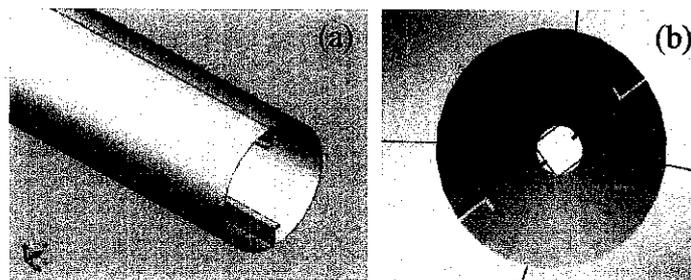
Drum granulator designed with scoops. (a) Isometric view (b) Front view
